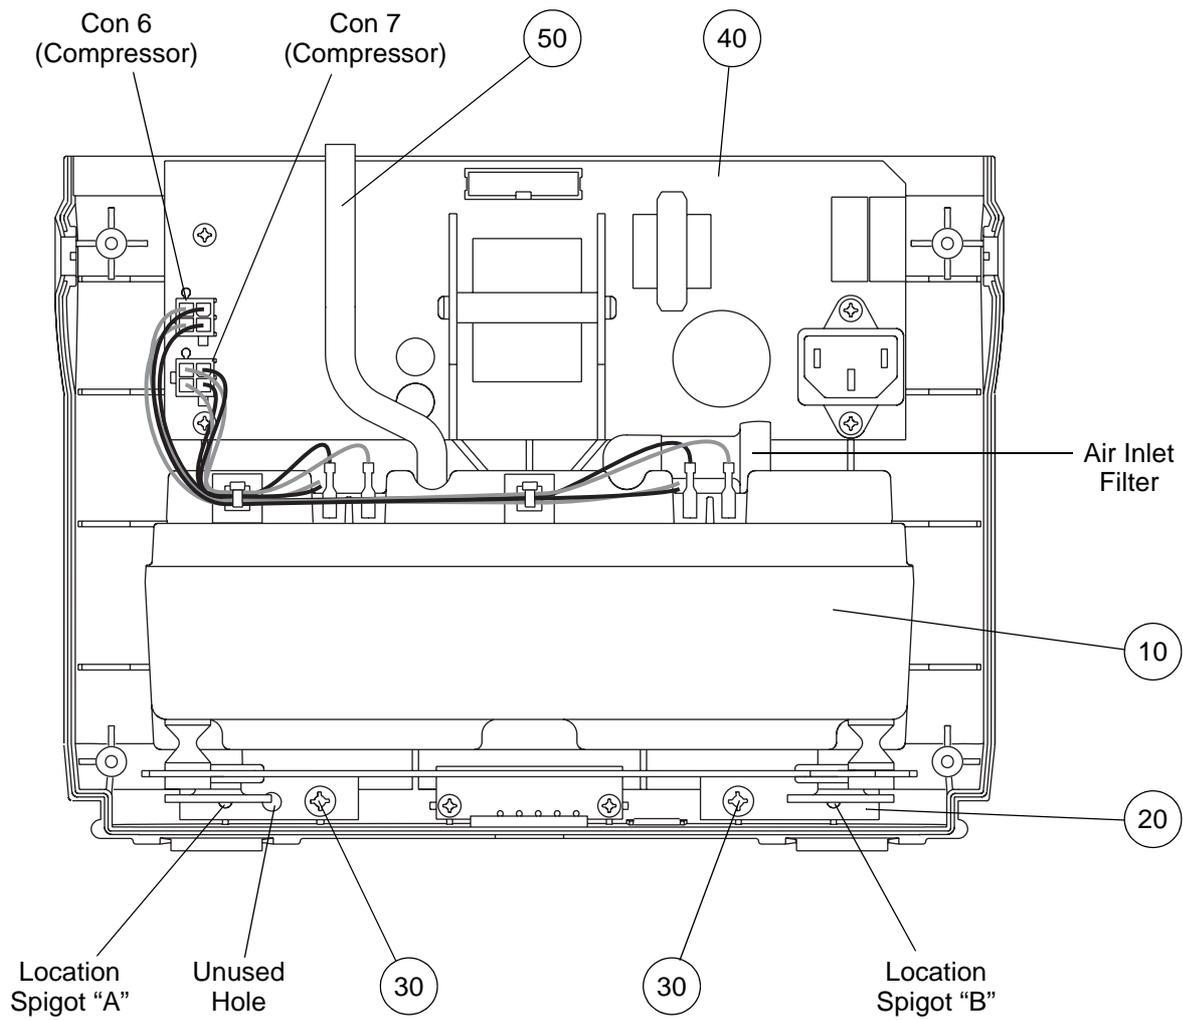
Replacing the Compressor Assembly and Compressor Filter
